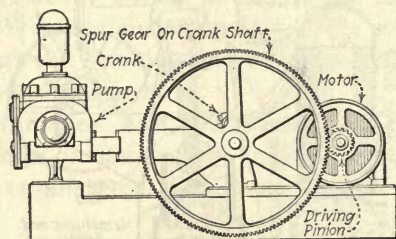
Pump Driven By Motor Through Spur Gearing.
